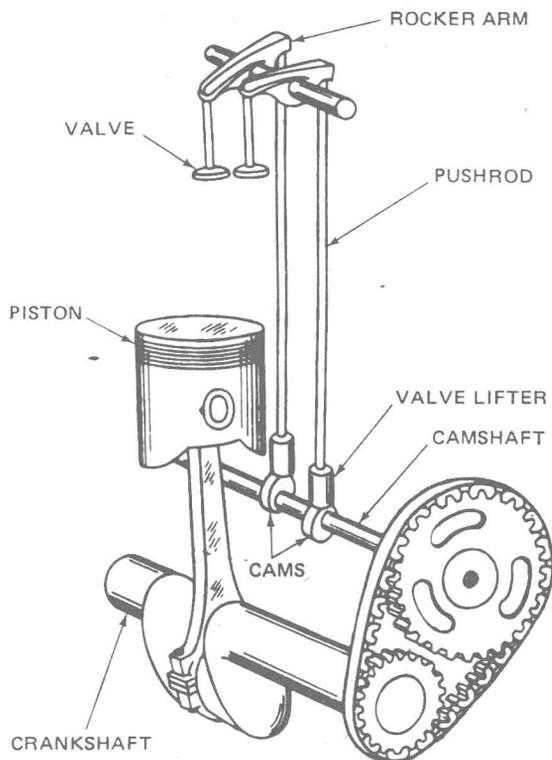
Valve-operating mechanism for an I-head, or overhead-valve, engine. Only the essential moving parts for one cylinder are shown.
